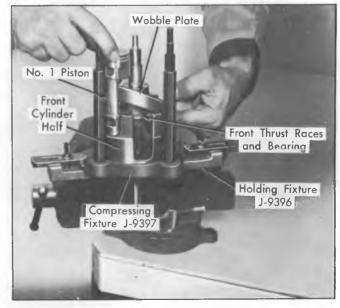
Installing Piston, Front Ball and Seat and Rear Ball
